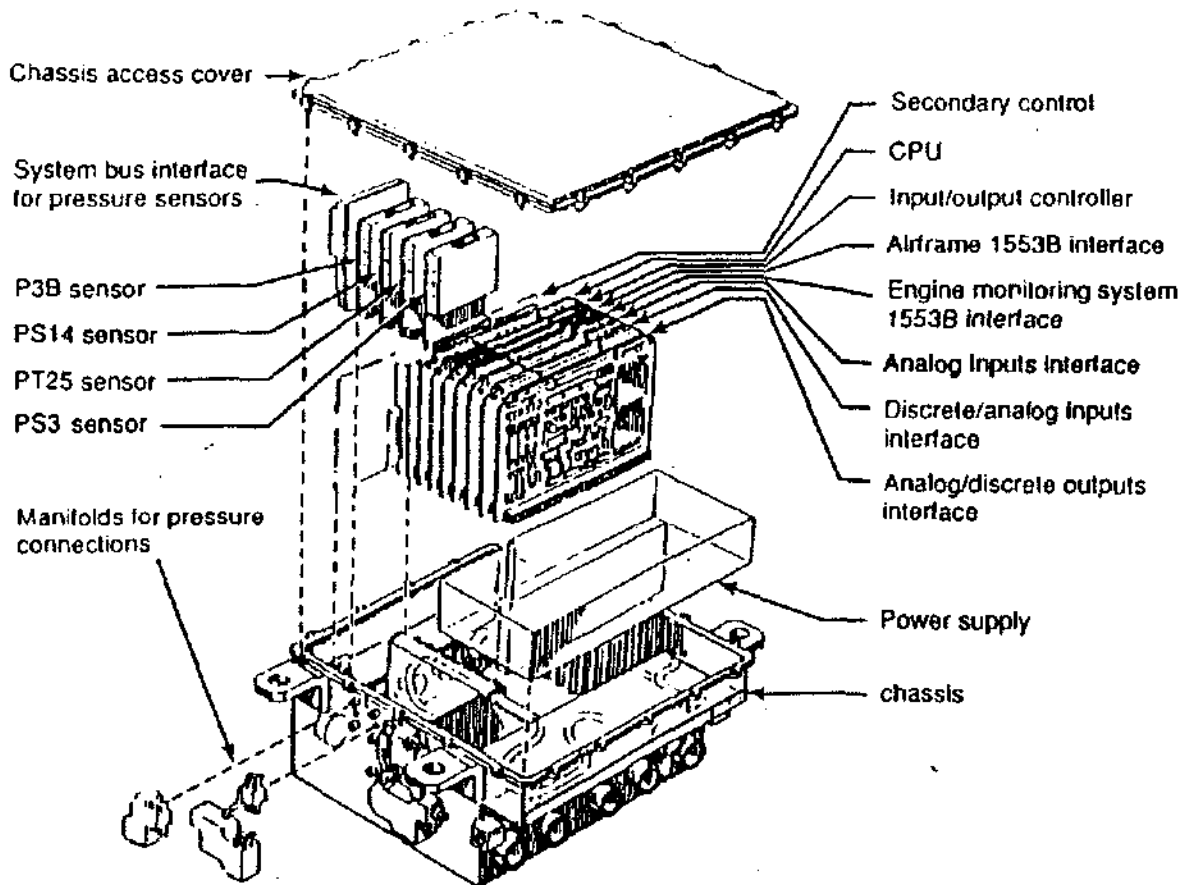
F110-GE-129 ECU Mechanical Assembly
